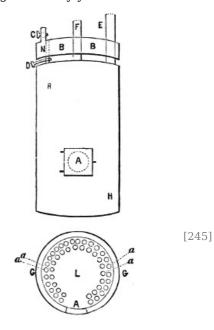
Read's Multi-Tubular Boiler, 1788.
